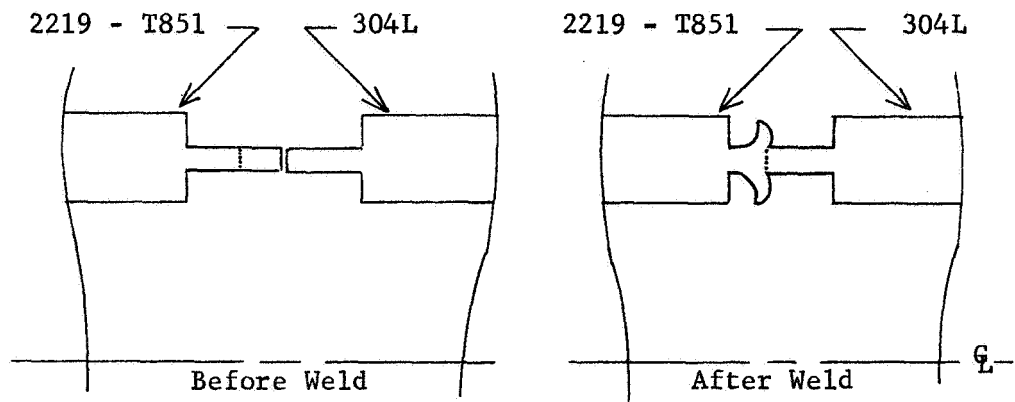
Inertia Welding 304L Stainless to 2219/6061 Aluminum For Production Joints
